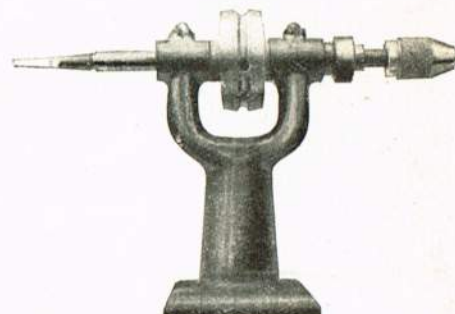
Polishing Taper Spindle, fitted with three-jaw drill chuck opposite to take drills up to  $\frac{3}{16}$ " diameter. Black and red stove enamelled.
